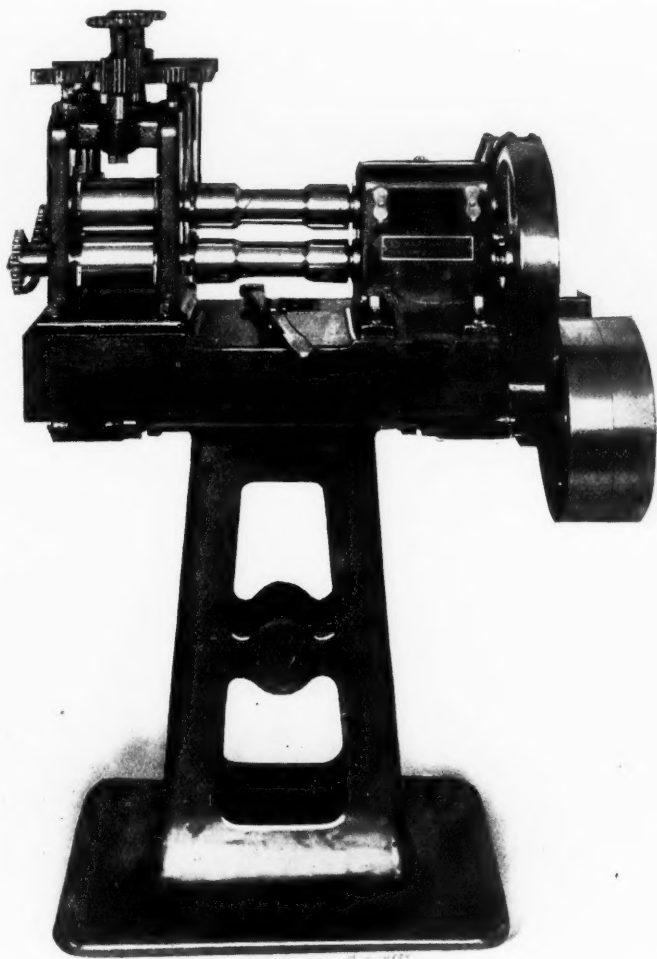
The Oliver Rolling Mill for forming or embossing Strip Sheet Metal
